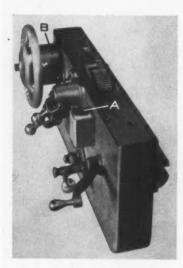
View showing electric dilectional switch A and torque motor B of power rapid traverse attachment of Nebel lathe
